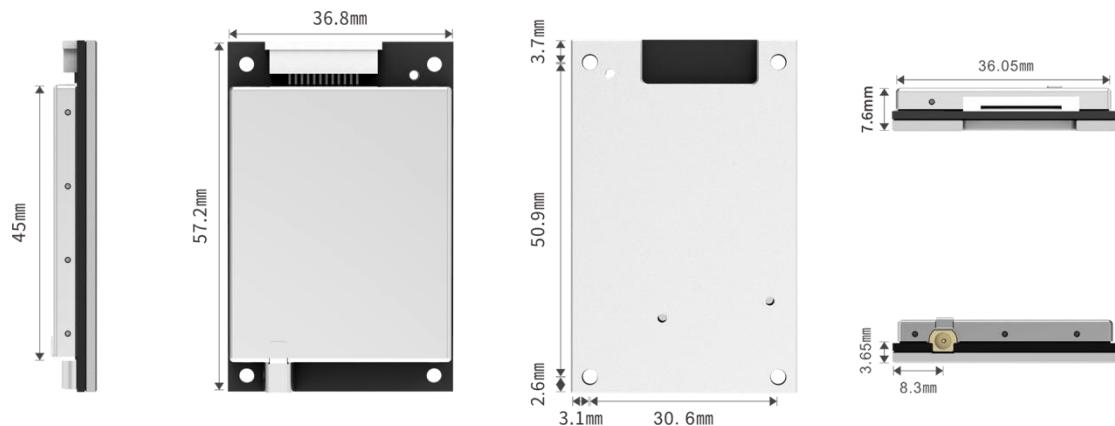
a Single Channel Module Appearance and Dimension
